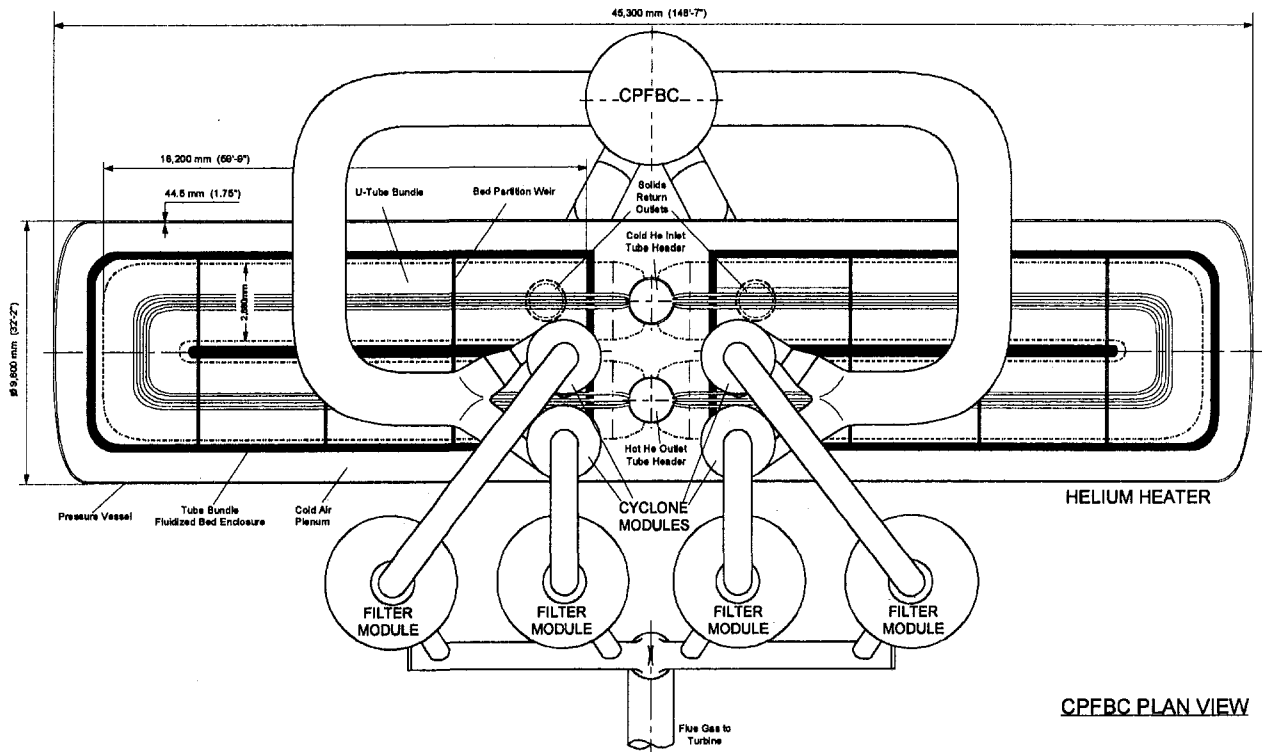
Plan view of CPFB for 400 MWe DBC-GT power plant
